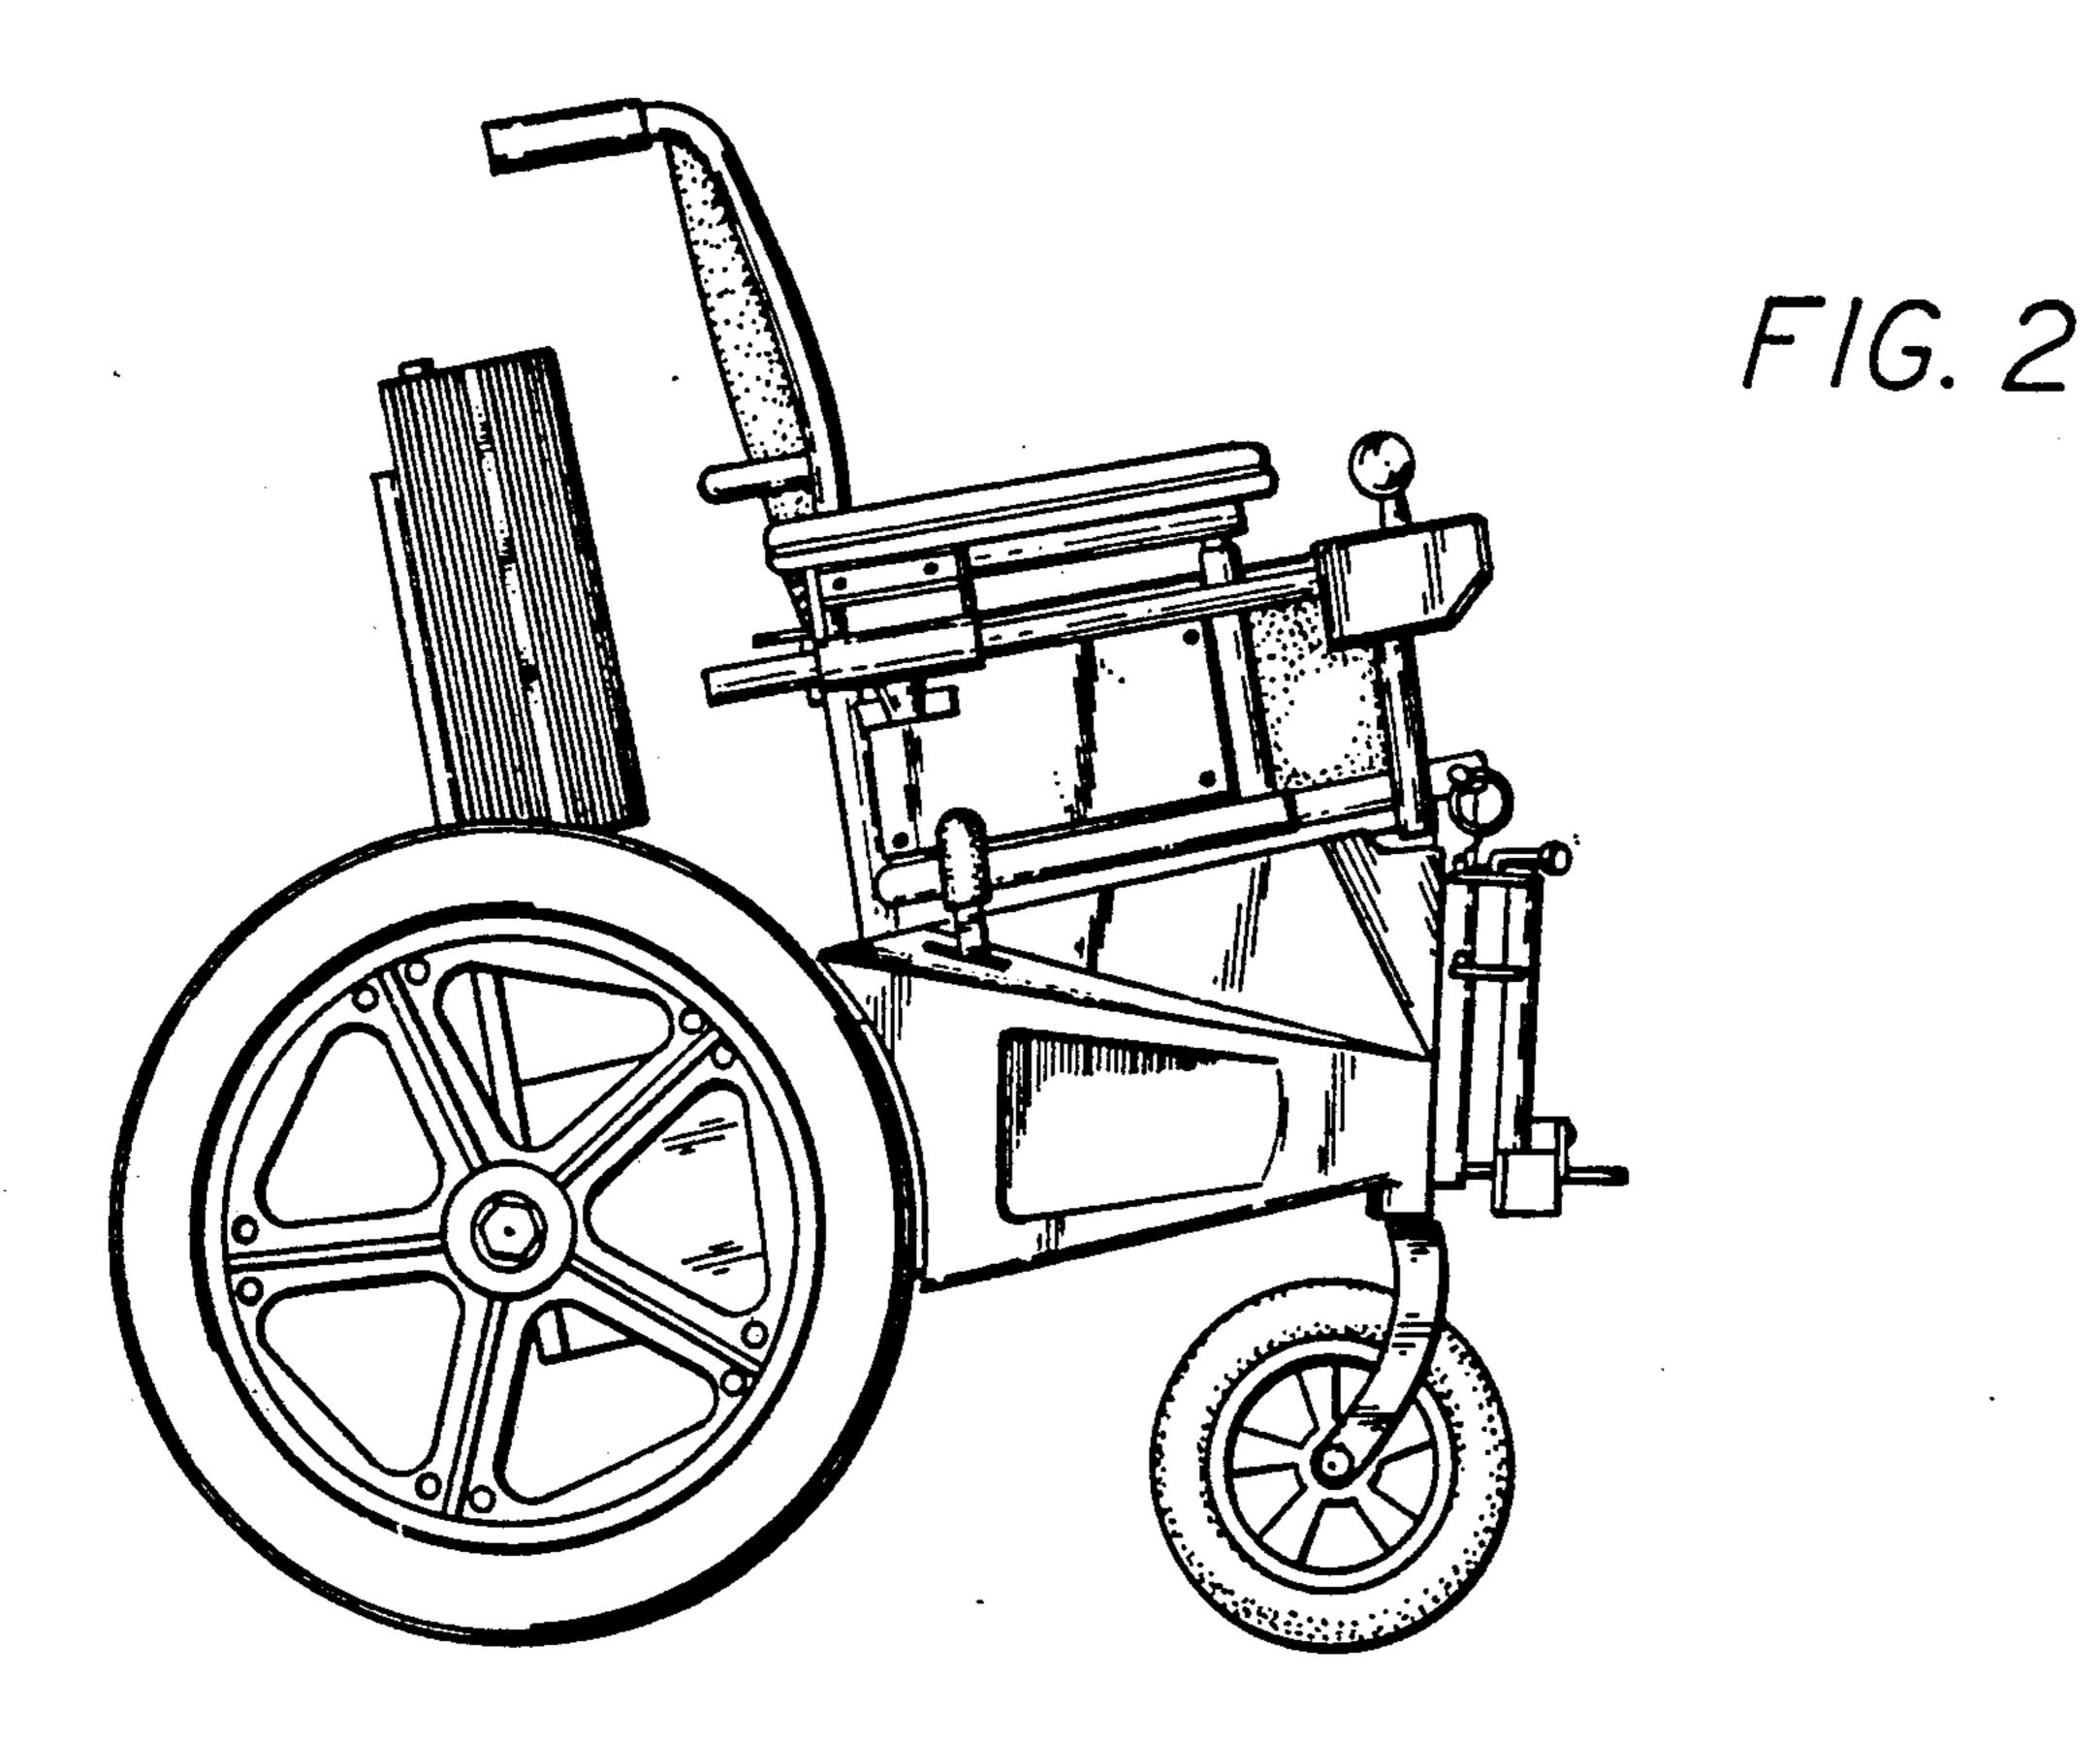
is a front, right side and top perspective view of a power drive wheelchair showing my new design; FIG. 2 is a left side elevational view thereof, the right side elevational view being a mirror image of that shown;
